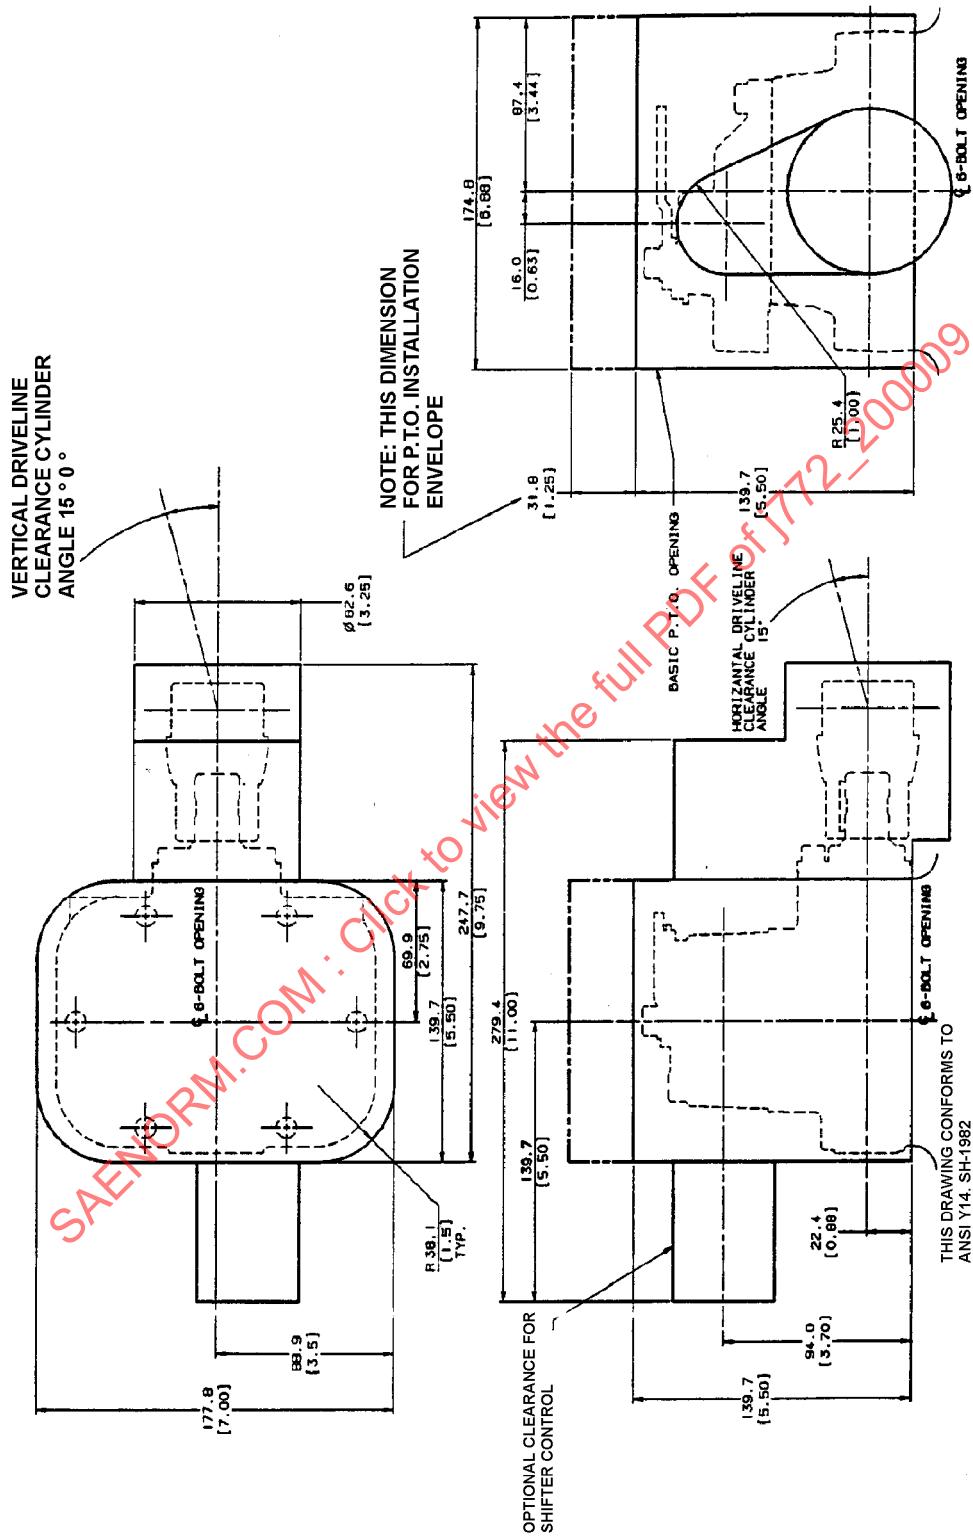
TYPE I—SIX-BOLT, SINGLE GEAR P.T.O.
